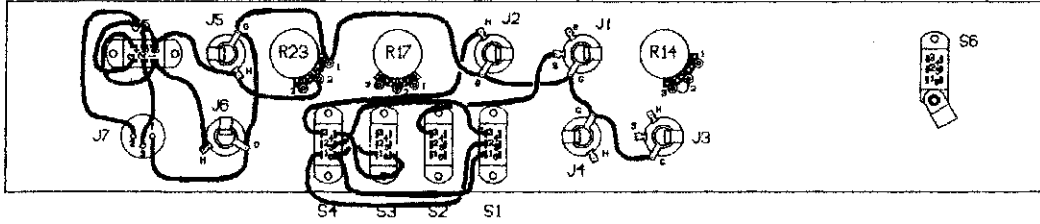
#22 stranded wire is used for the connections between front panel control and jacks as shown above.
